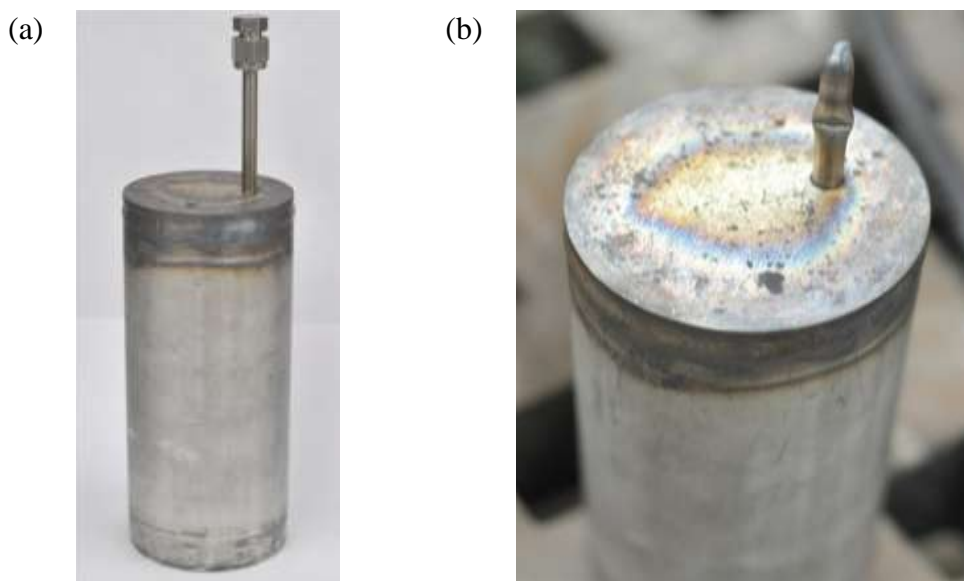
FLiNaK test three vacuum sealed corrosion crucibles. (a) Prior to finishing. (b) Detailed view of vacuum crimp and weld.
